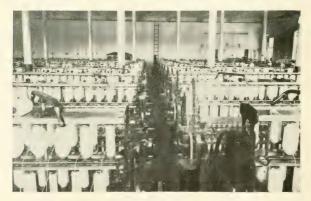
SPINDLE, RING SPINNING FRAMES Driven by 5-hp squirrel-cage motors
